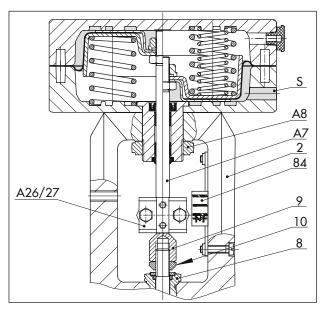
Type 3271 Pneumatic Actuator on a Series 240 Valve
